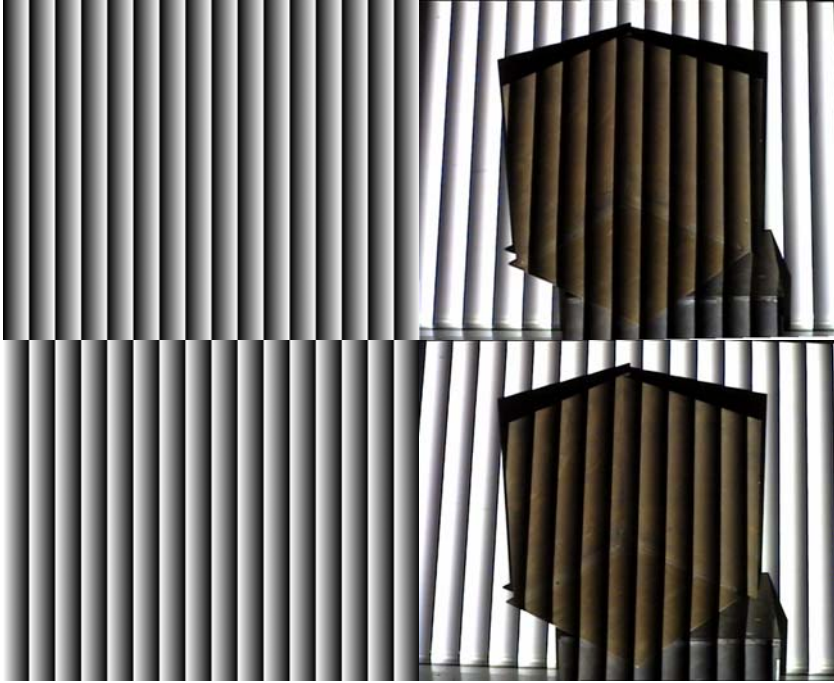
The light pattern and a captured image pair of a test weld workpiece with the light pattern projecting
